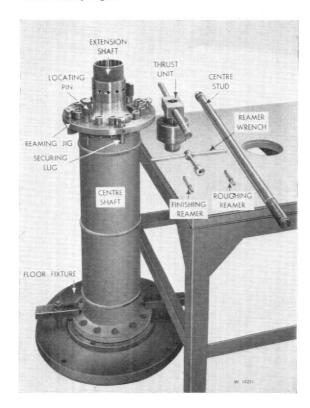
Centre shaft in position on floor fixture, and tools used.
